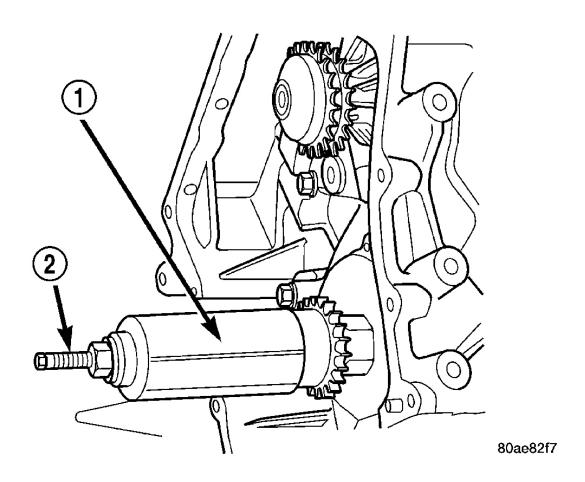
Installing Crankshaft Sprocket Courtesy of CHRYSLER LLC
